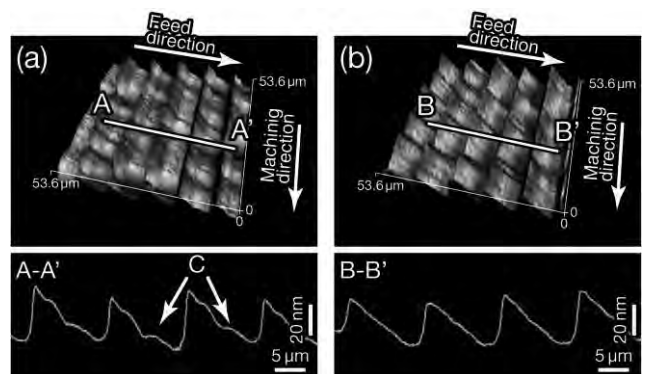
Surface topographies and cross-sectional images of the NiP surface after machining using (a) the FIB tool, and (b) the heat-treated tools, following a cutting distance of 19040 m.
